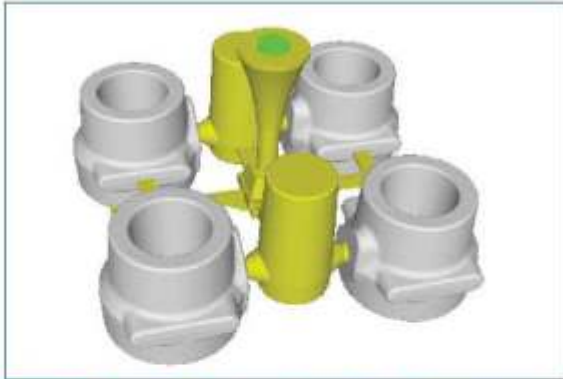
Model of fully rigged design with 4 castings per mould.
